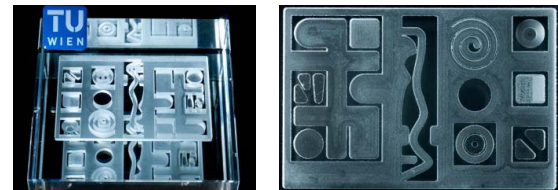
Glass testpart, produced by ultrasonic assisted machining
